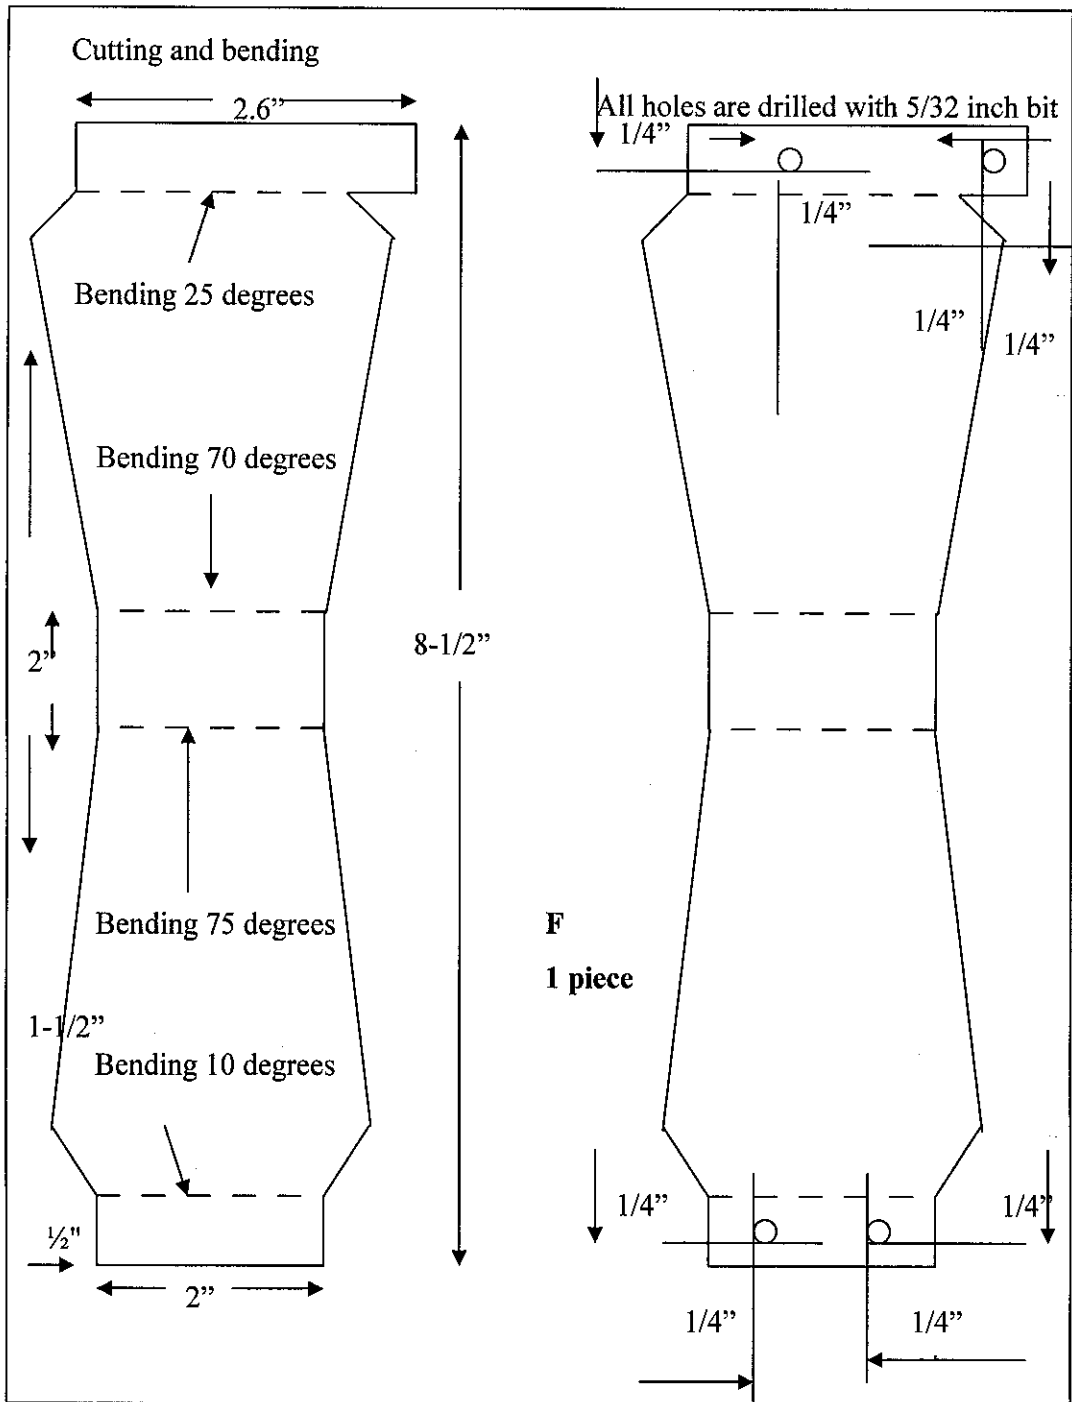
Cutting, bending, and drilling diagram for snake's tail section
